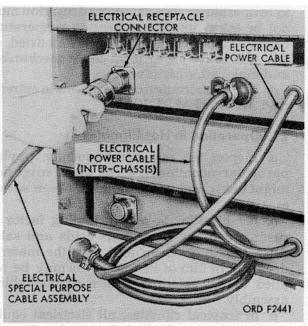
Connecting cable assembly to electrical receptacle connector in counter chassis assembly.
